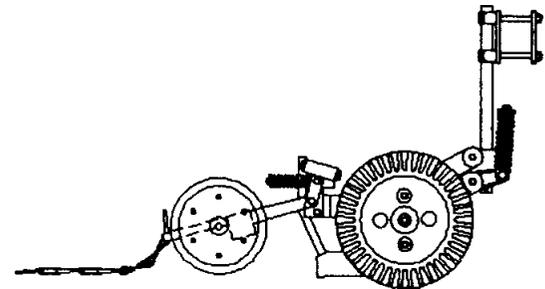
Yetter seeder coulters showing plastic depth gage wheel and drag chain attachment.
